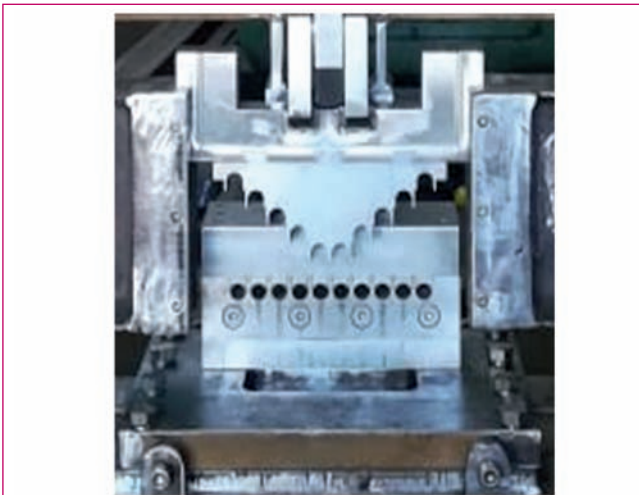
Gripper, stationary block, cutting tool and guide plate assembly
